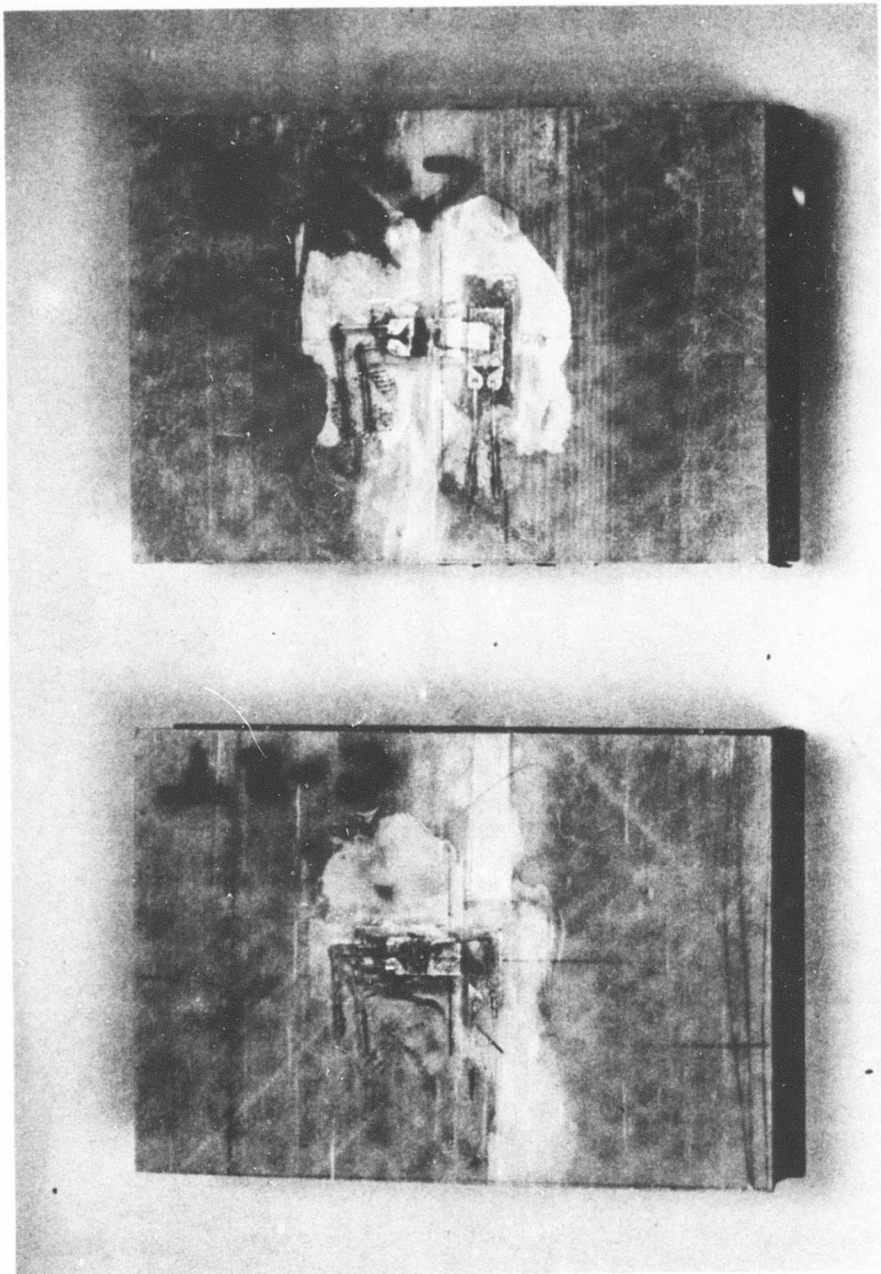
Edgewise Compression Specimens Showing Skin Failure.
